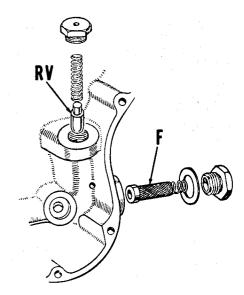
View of oil pressure relief valve (RV) and engine oil filter (F) used on model 650ss. Filter can be removed without removing timing cover; relief valve can be removed after removing timing cover.
